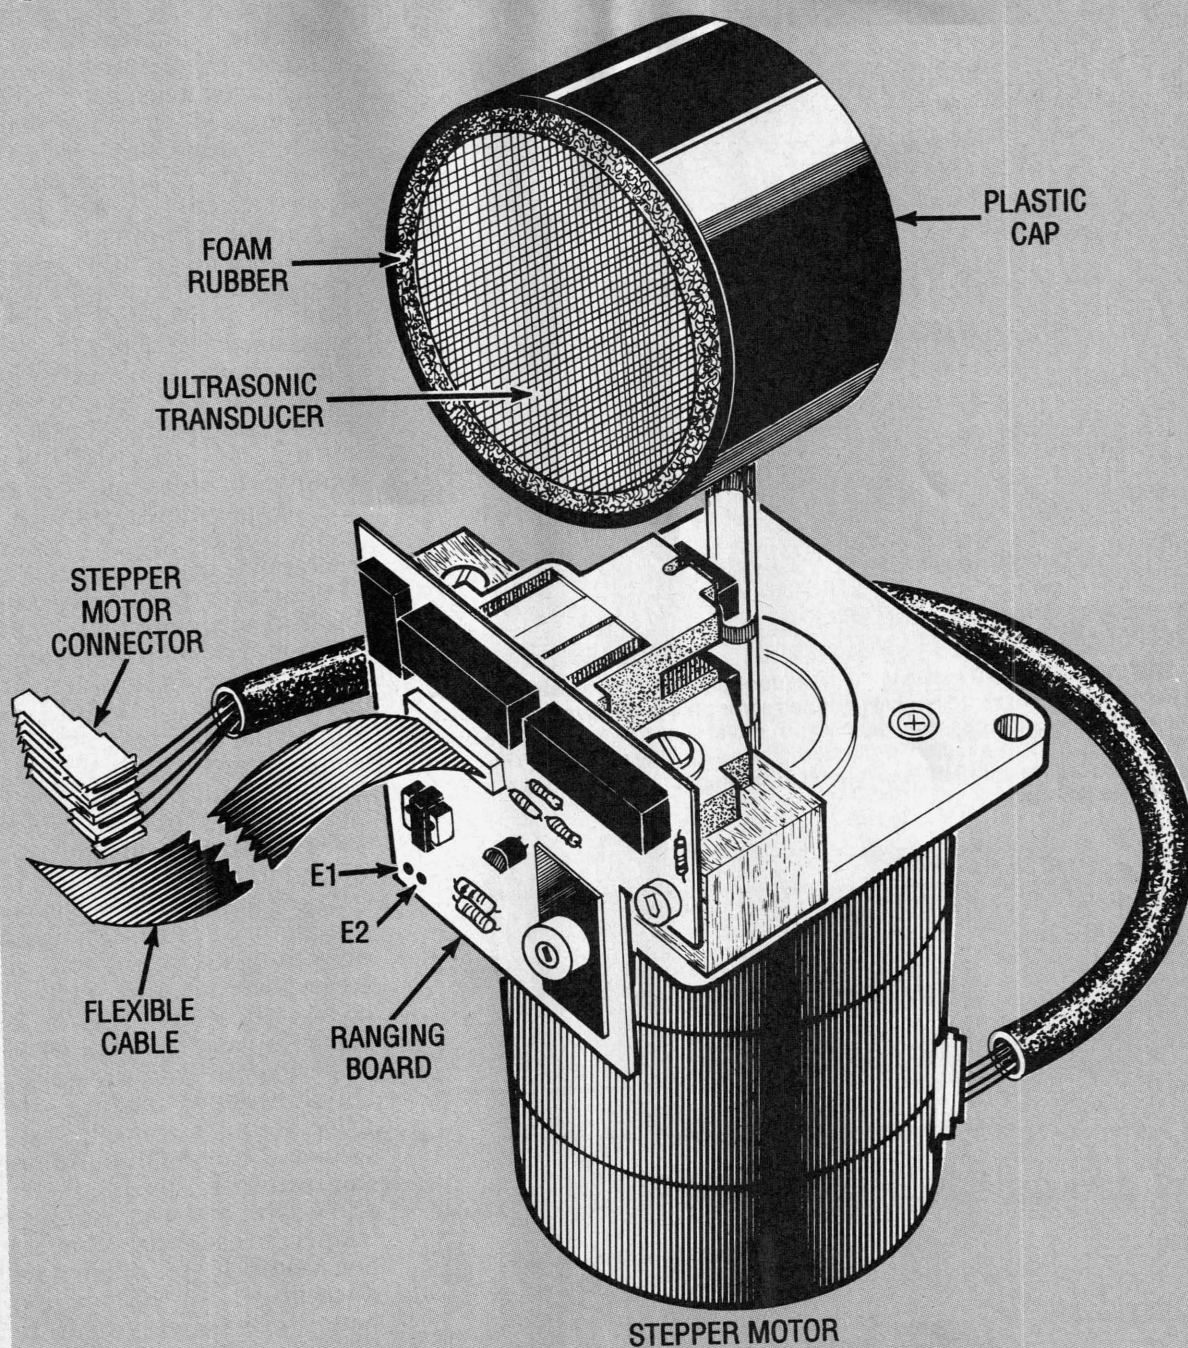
THE TRANSDUCER IS MOUNTED to the stepper-motor output shaft. The ranging board is also mounted to the stepper motor.
